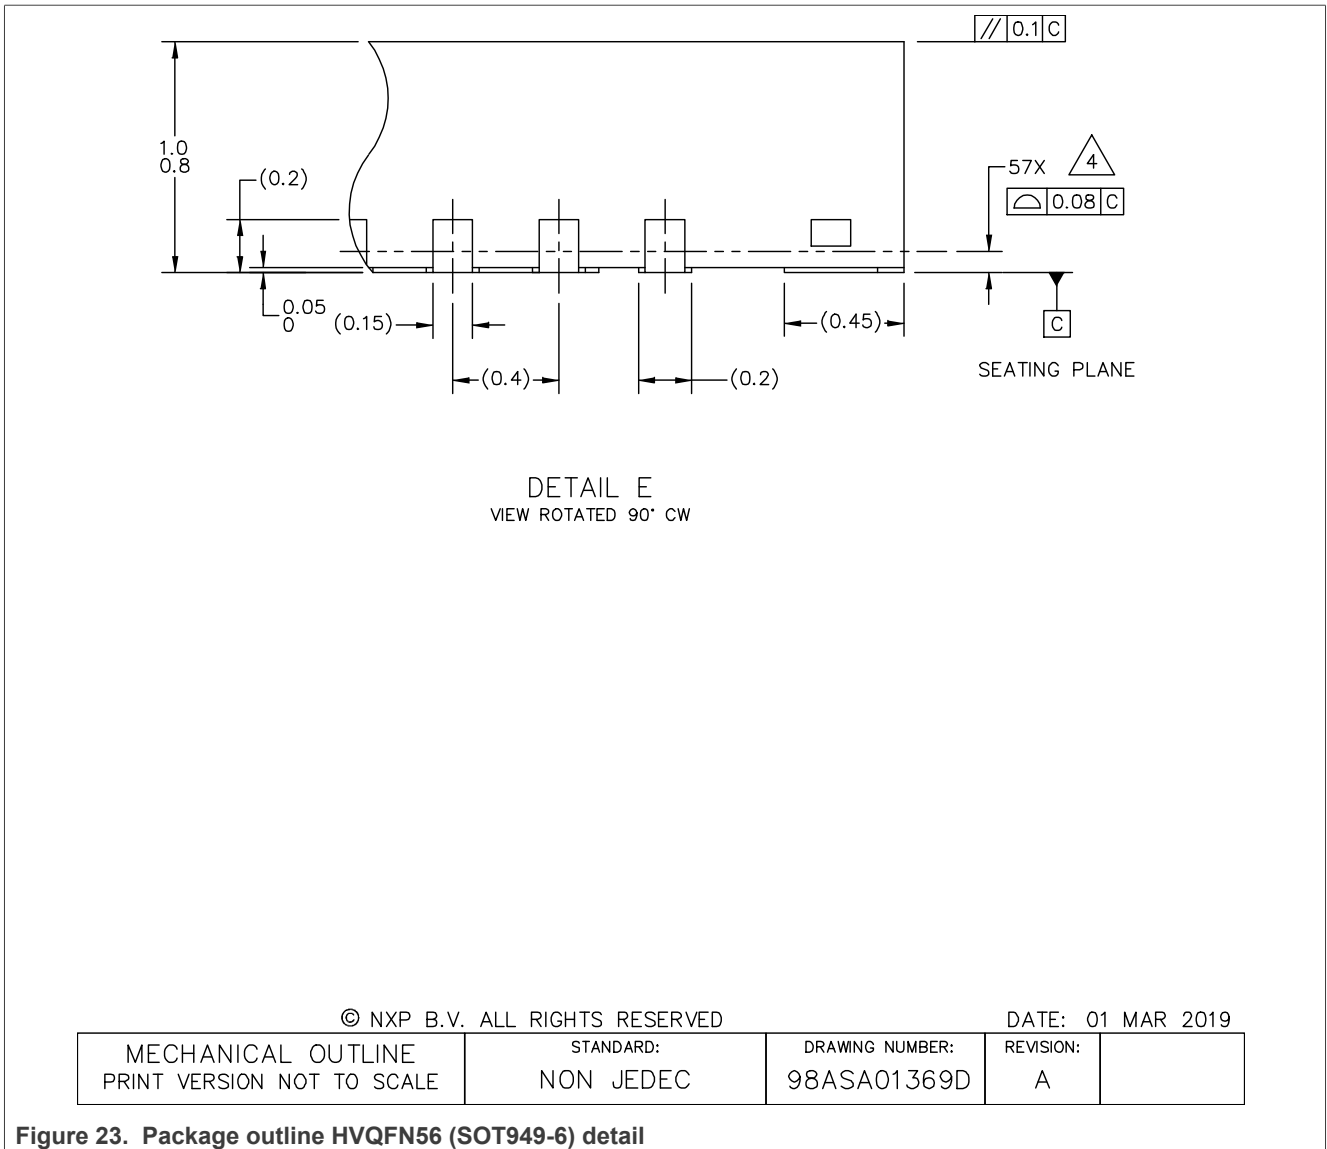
Package outline HVQFN56 (SOT949-6) detail
